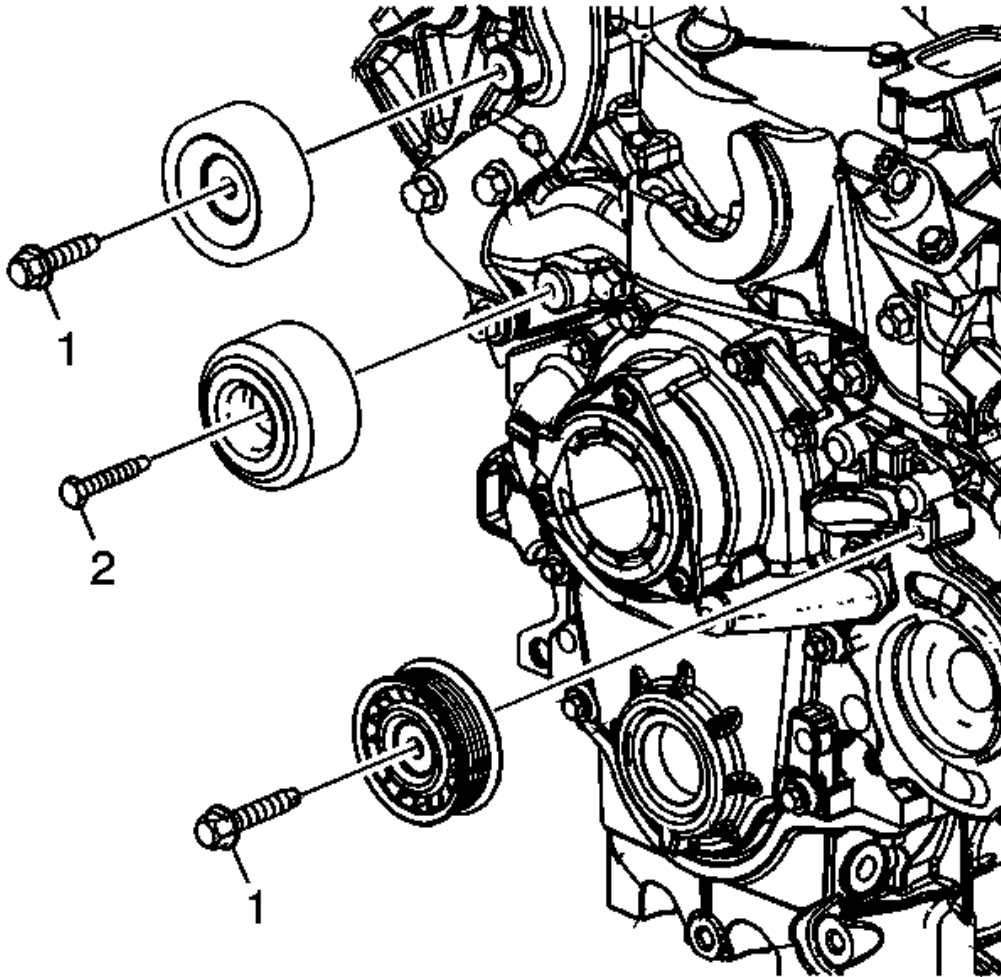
Identifying Idler Pulley Bolts & Pulleys
